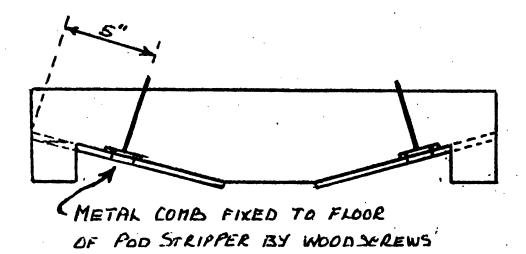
ASSEMBLY DETRILS OF METAL COMB
